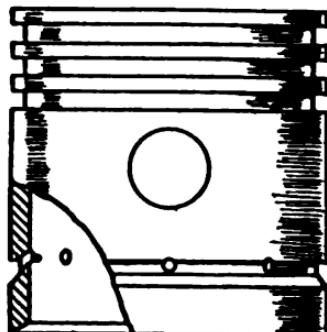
Method of Grooving and Drilling Piston to Overcome Excessive Lubrication and Smoking
